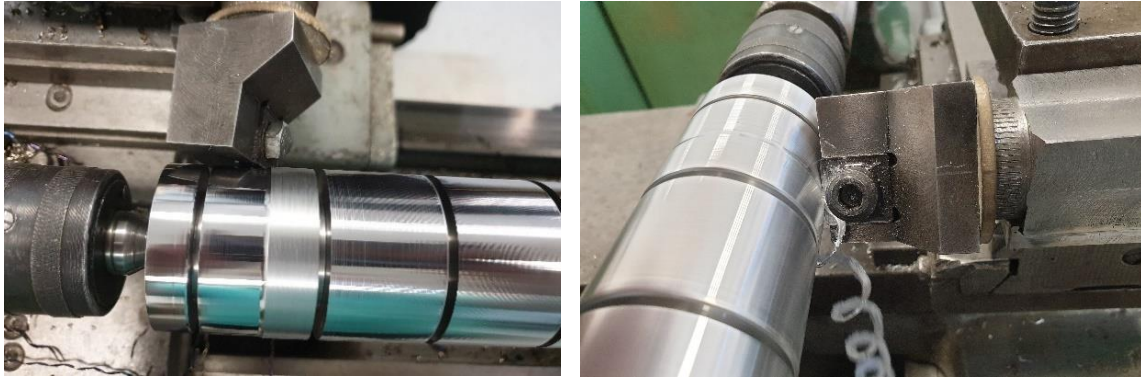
Machining with an original special tool with oblique tangential cutting edge
